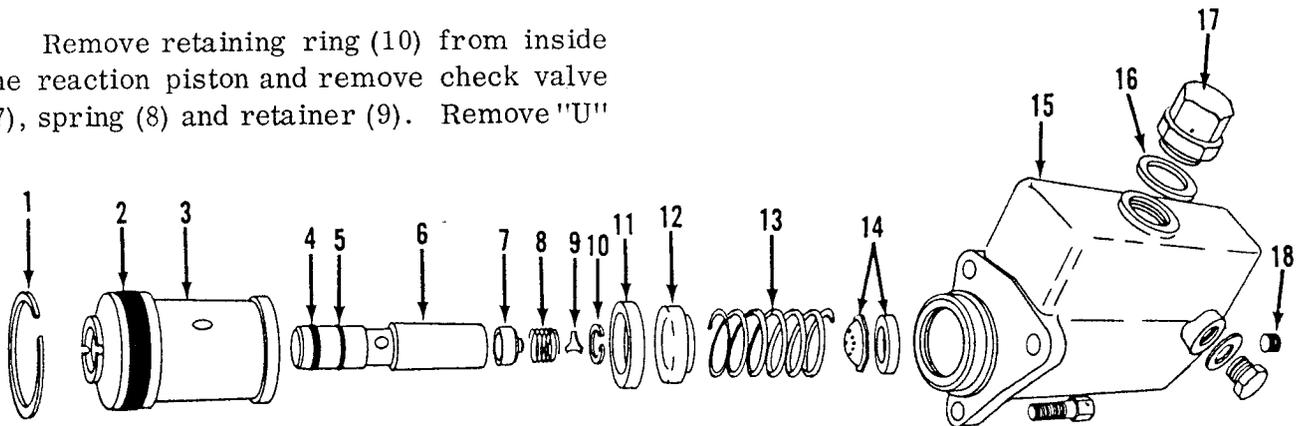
EXPLODED VIEW OF MASTER CYLINDER (POWER BRAKES)
